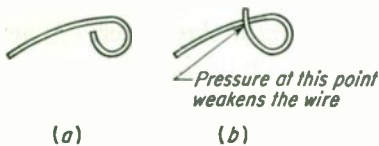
(a) Properly looped wire to fit around a machine screw and under a nut. (b) Improperly looped wire.
